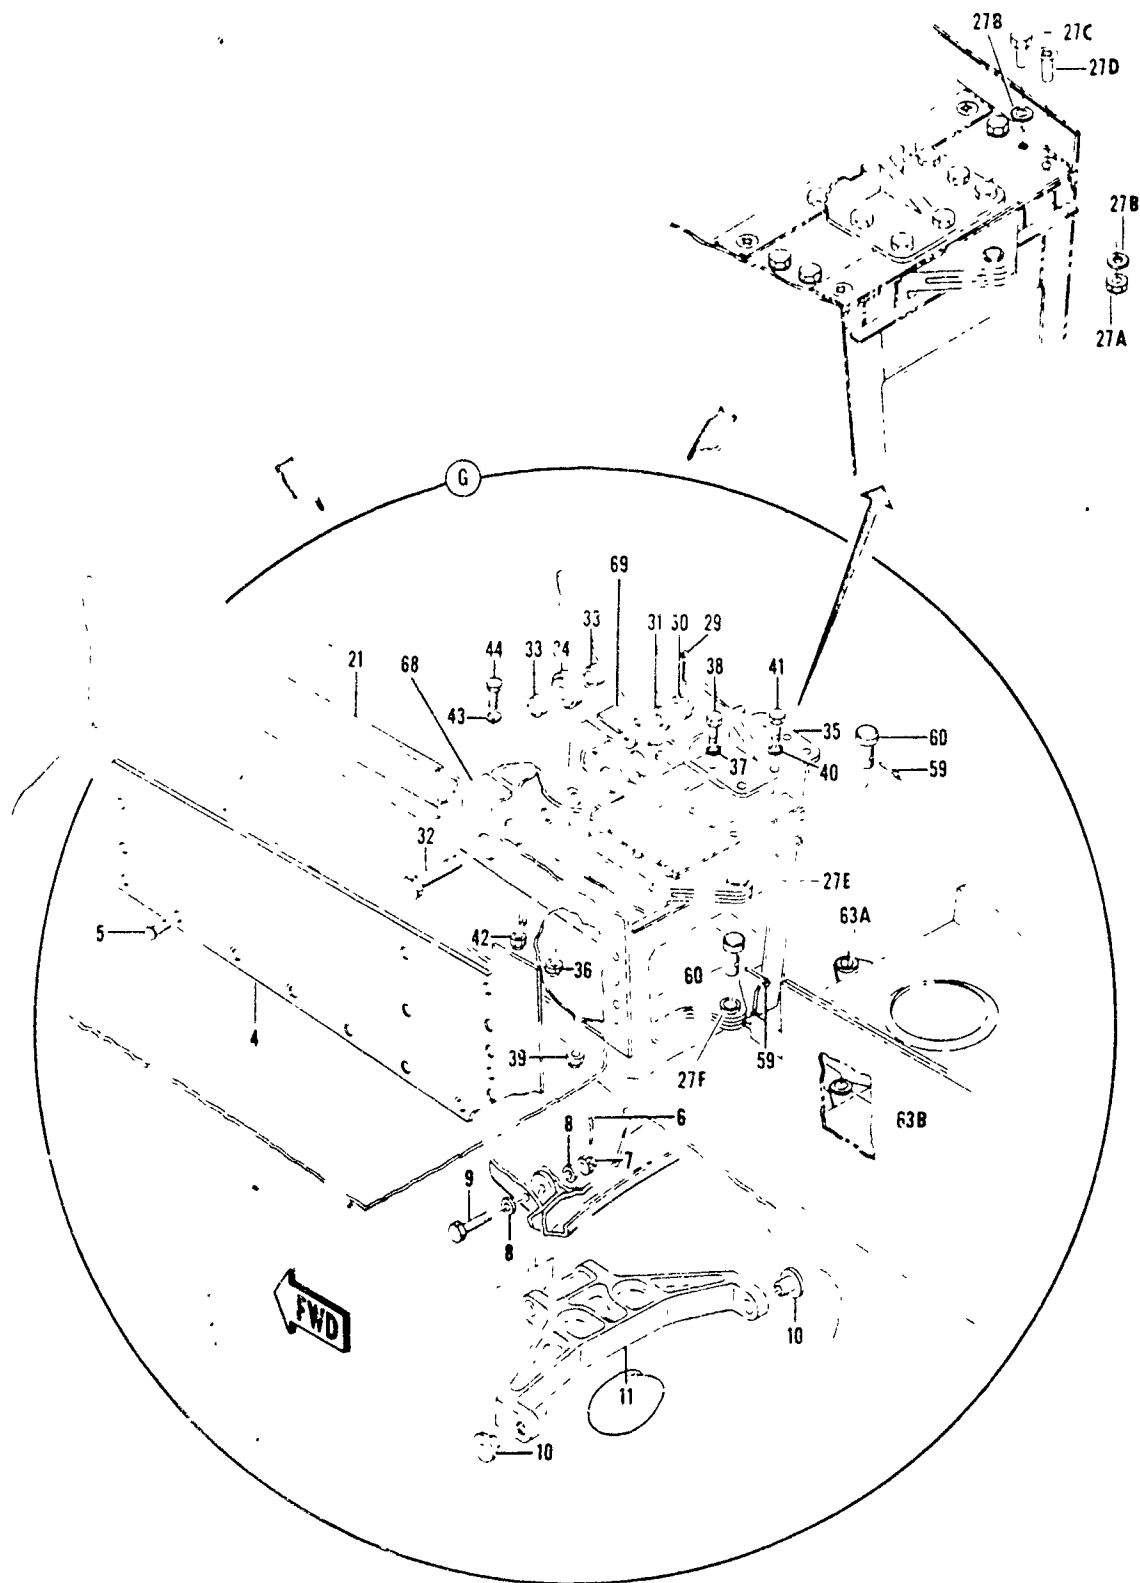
Aft Thrust Reverser and Sleeve Assembly (Sheet 3 of 3)
